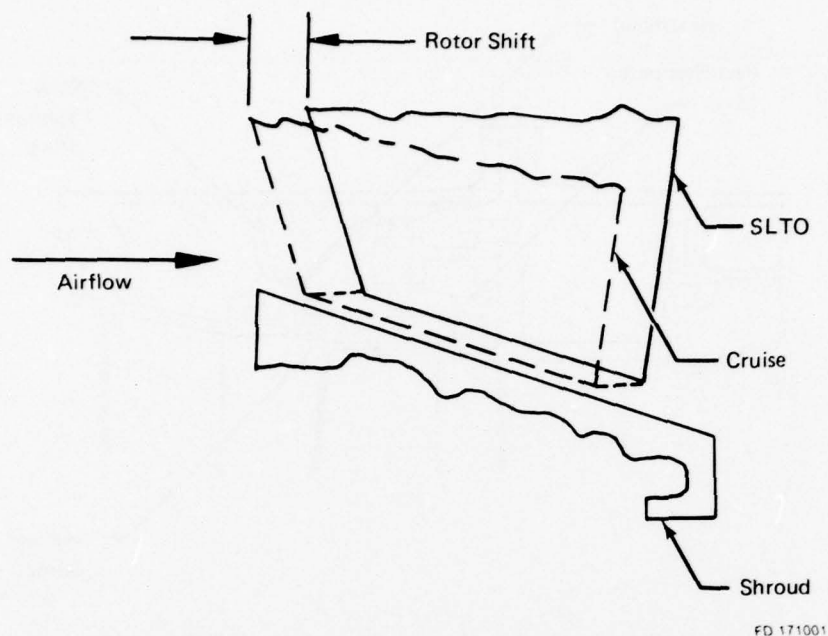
Scheme No. 37, Axial Rotor Shift, Conical Shroud
